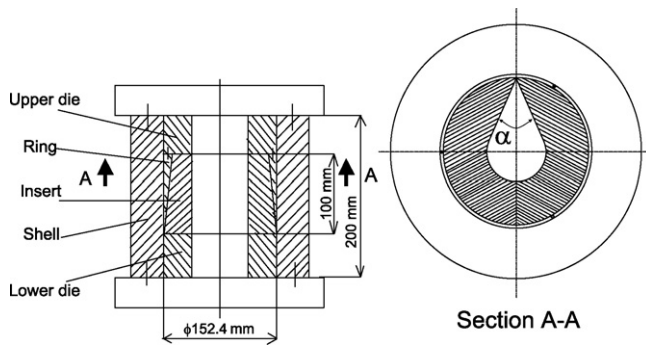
Pear-shaped expansion sub-assembly showing: die inserts, ring and housing.
